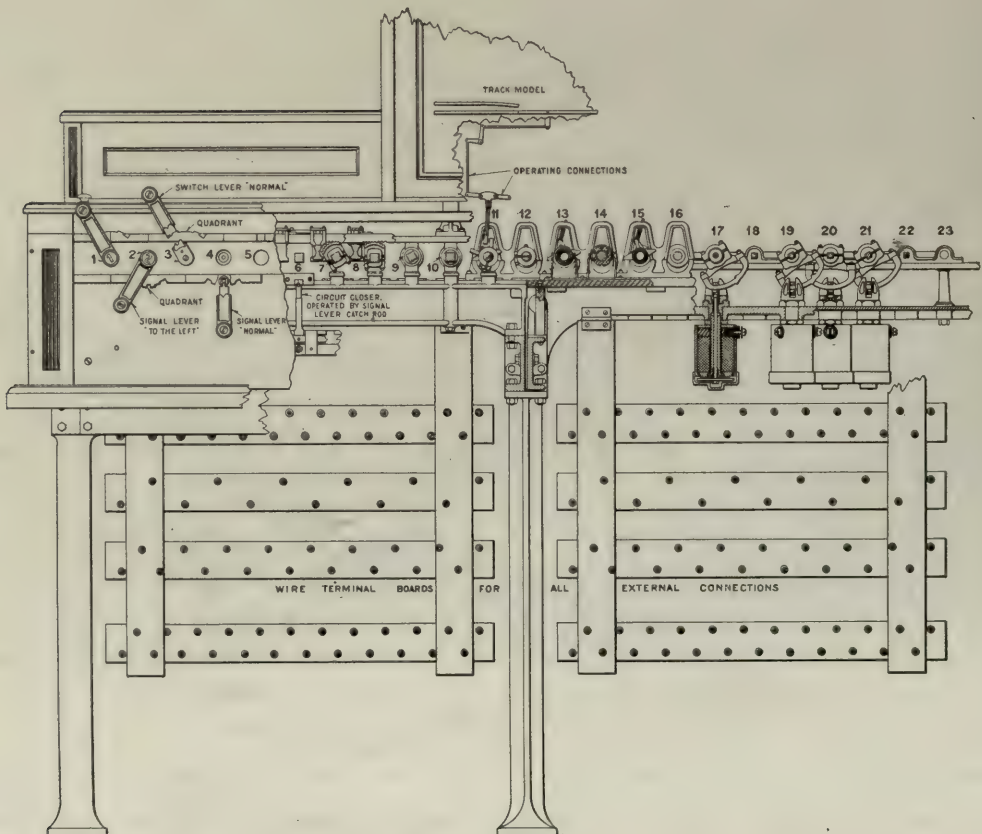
Electro-Pneumatic Interlocking Machine; Front Elevation Partly in Section.
